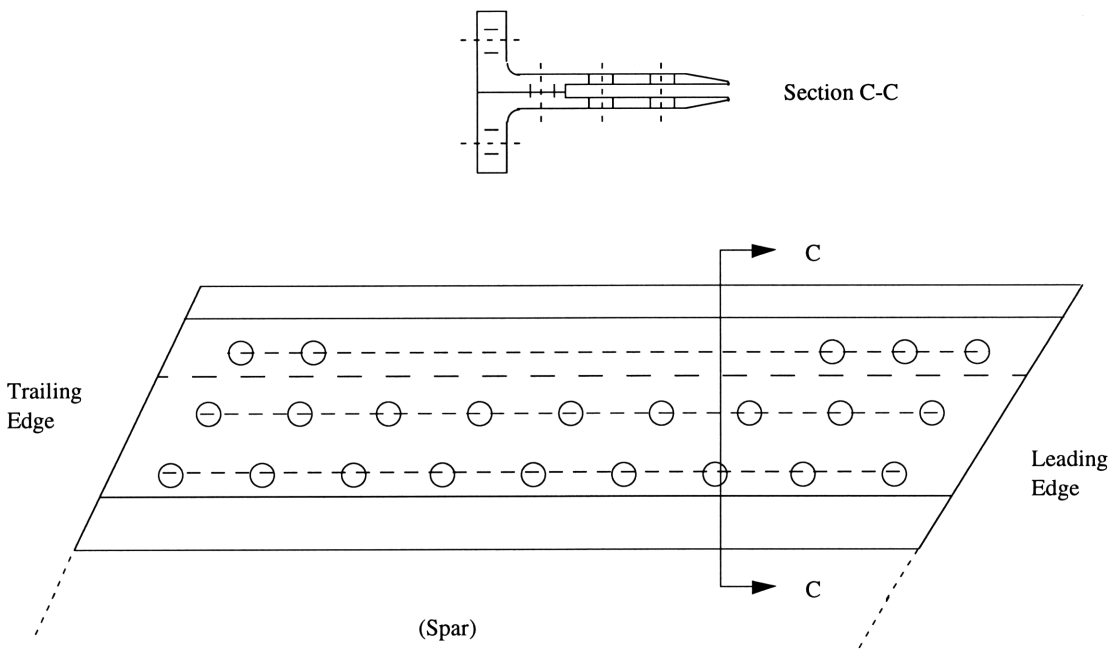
Cross-section and top view of root attachment, including bolt pattern
